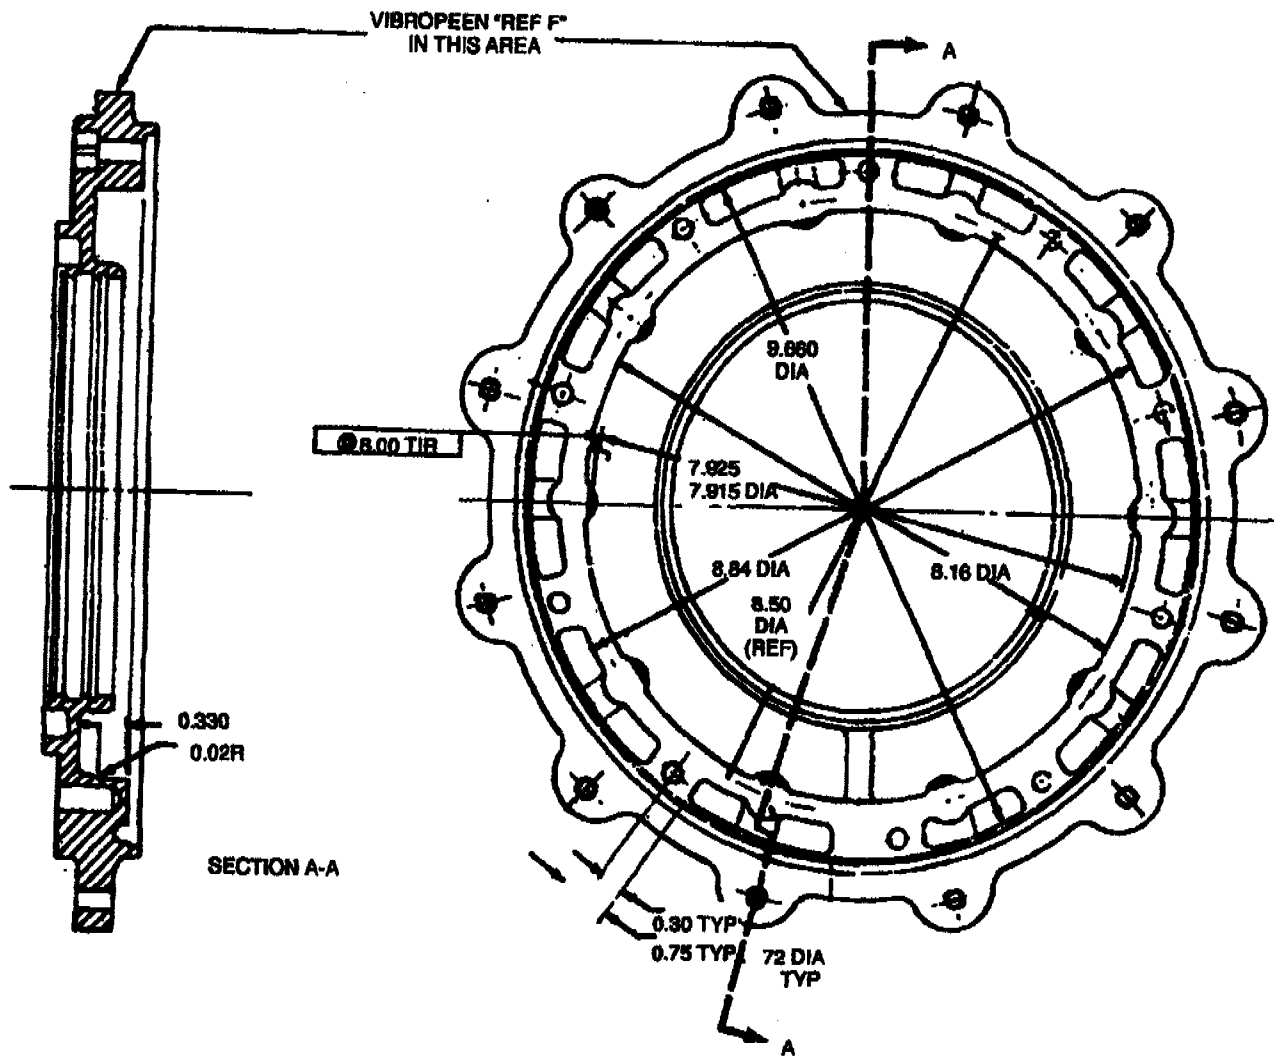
Modification of T53-L-701A Seal Housing Assembly.
